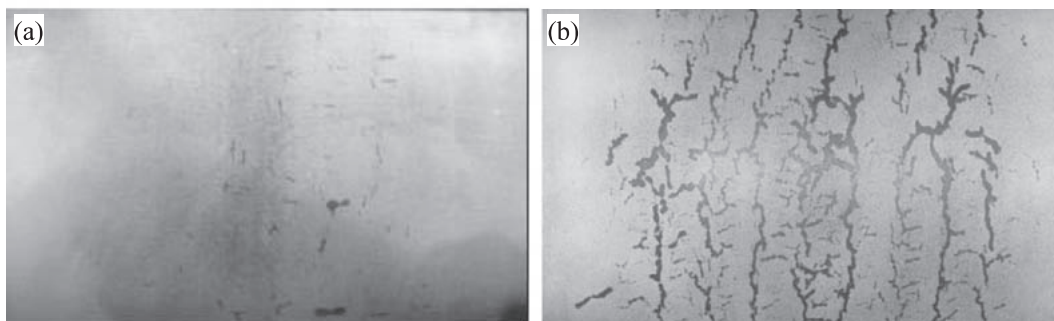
Appearances of test roll surfaces overlay-welded with (a) 11Mo-10Co and (b) UD-520 alloy powder with penetrant testing after heat-crack test.
